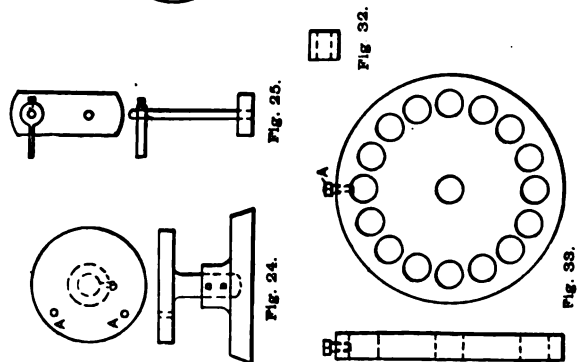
is a hand grinding rest which is very handy for use on the universal grinder. It is adjustable up and down for height, and is used for hand grinding circular and straight form tools, sharpening metal slotting saws, formed cutters, etc. Fig. 26 shows the application of the hand rest to the grinding of saw teeth in a blank. The tooth rest used in connection with this operation is shown in Fig. 25. These saws are first ground on an arbor, the old teeth being ground off, leaving a perfect circle. The operator then puts on this device, setting the tooth rest so that the teeth will be about $\frac{1}{4}$ inch apart, and grinds around by hand, not quite bringing each tooth to a sharp point. On the last nine or ten teeth he evens up any inaccuracy in the spacing, the wheel being trued off to the exact shape of tooth space wanted.
